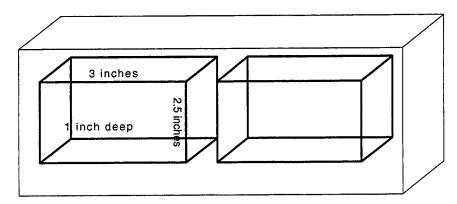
A 3-D Diagram of the Mold Used in Making the DMA and Izod Samples.
